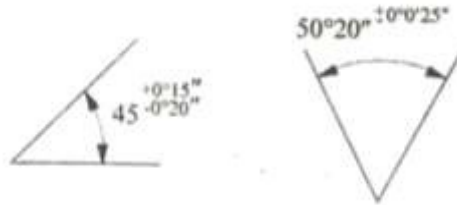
Indicating tolerances in angular dimensions
